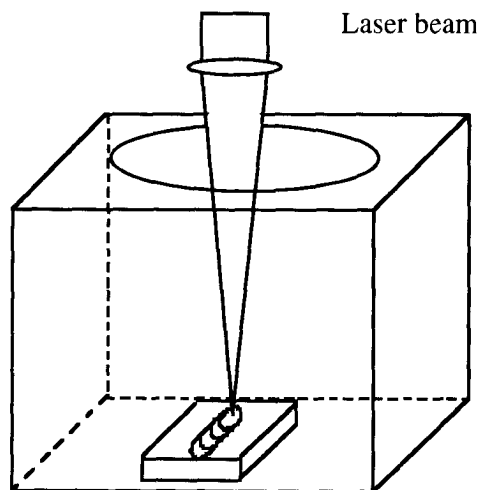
Schematic illustration of YAG laser welding.
